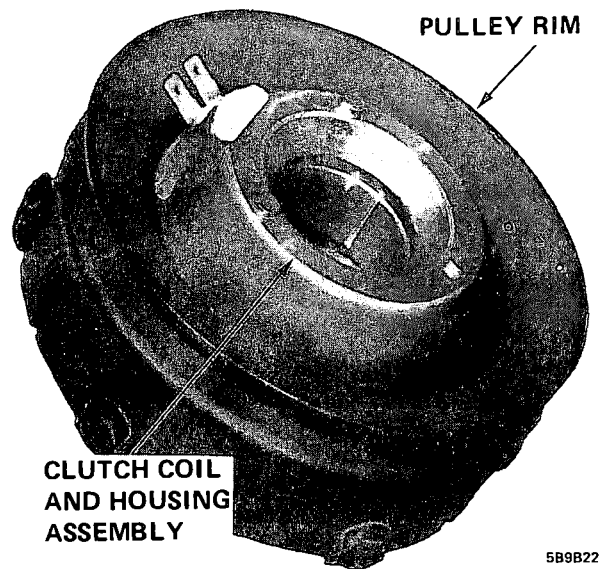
B-46 - Pulley Rim, Clutch Coil and Housing Assembly - 4 Cylinder Compressor
